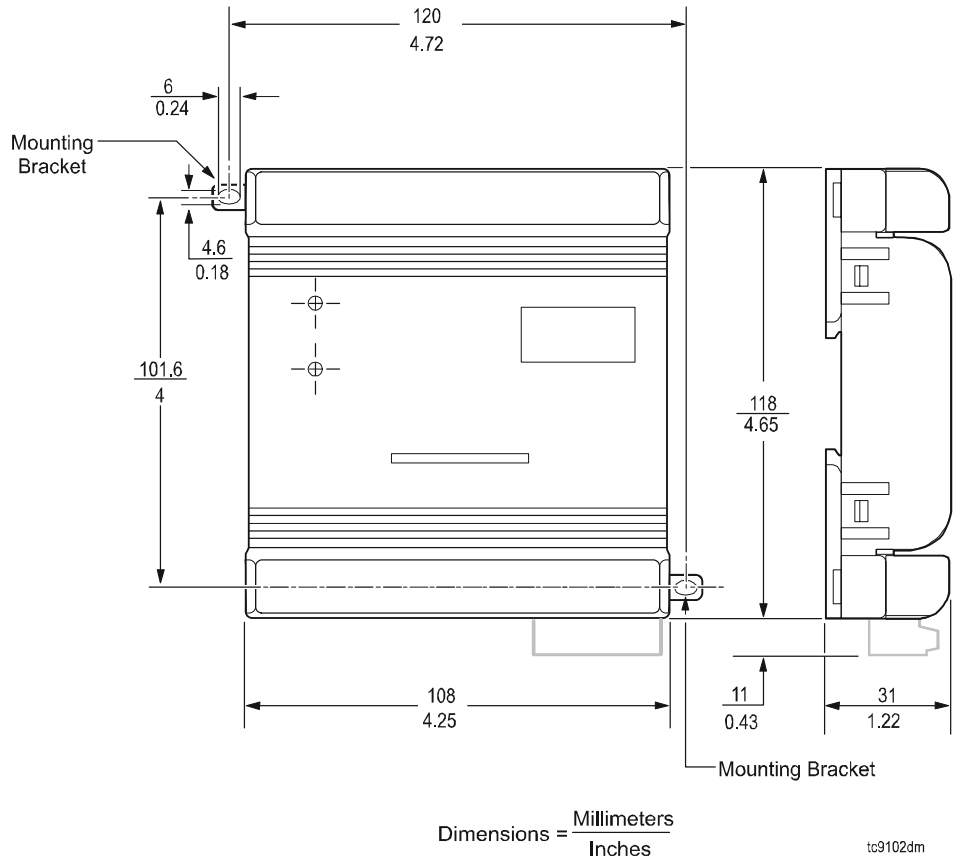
TC-9102 Controller Dimensions, millimeters (in.)
